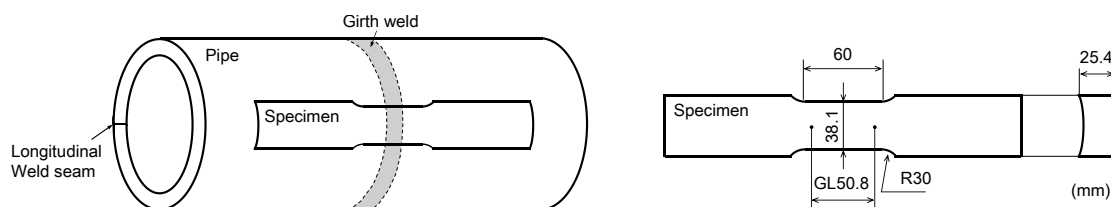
Geometry and dimensions of girth weld tensile test specimen
